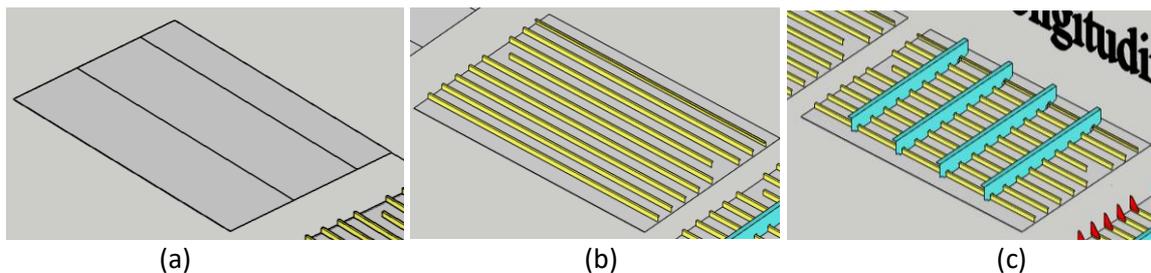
Joint (a) Longitudinal bulkhead, (b) Stiffener to longitudinal bulkhead, and (c) Vertical web frame to longitudinal bulkhead
